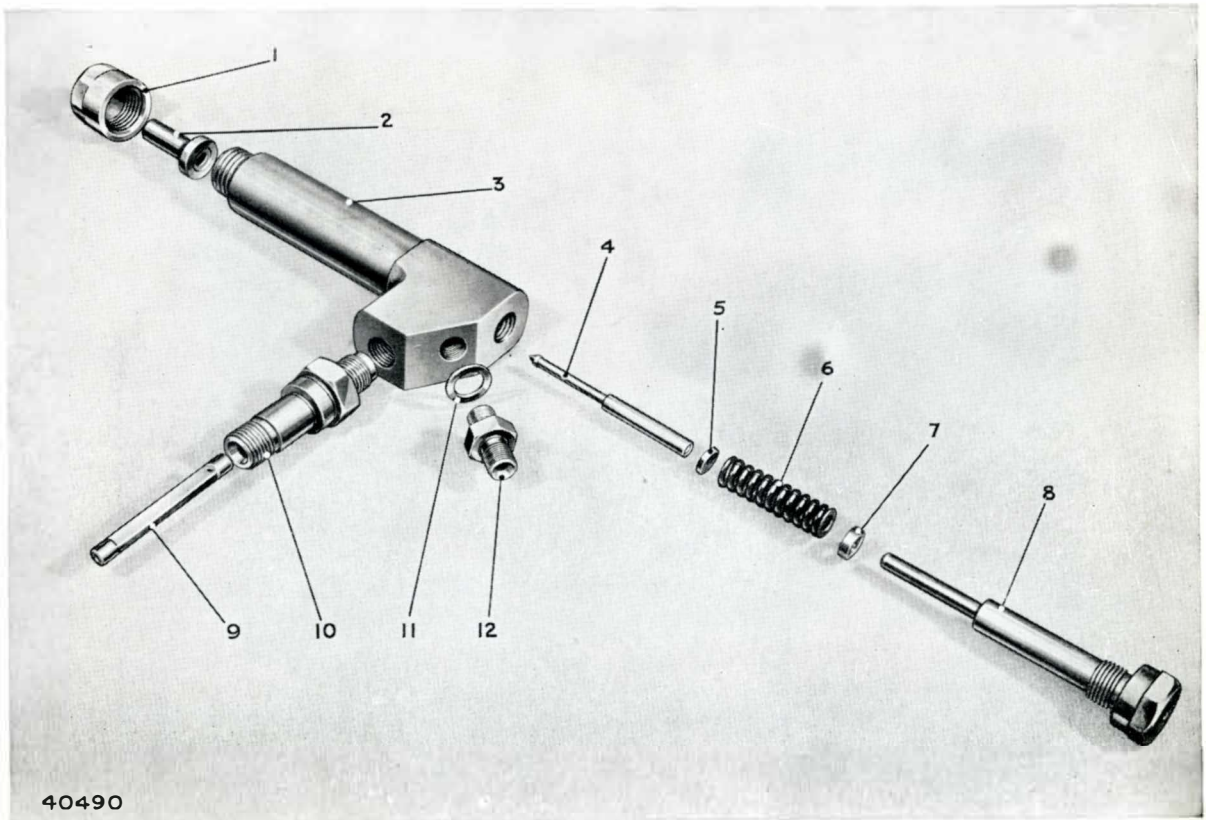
EXPLODED VIEW OF THE INJECTOR UNIT
